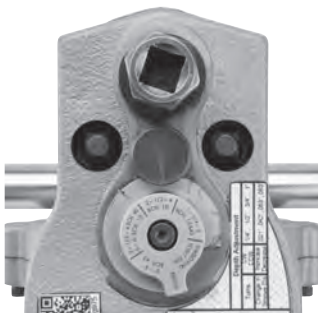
A – Place Correct Step of Gauge Under Adjusting Screw Head
